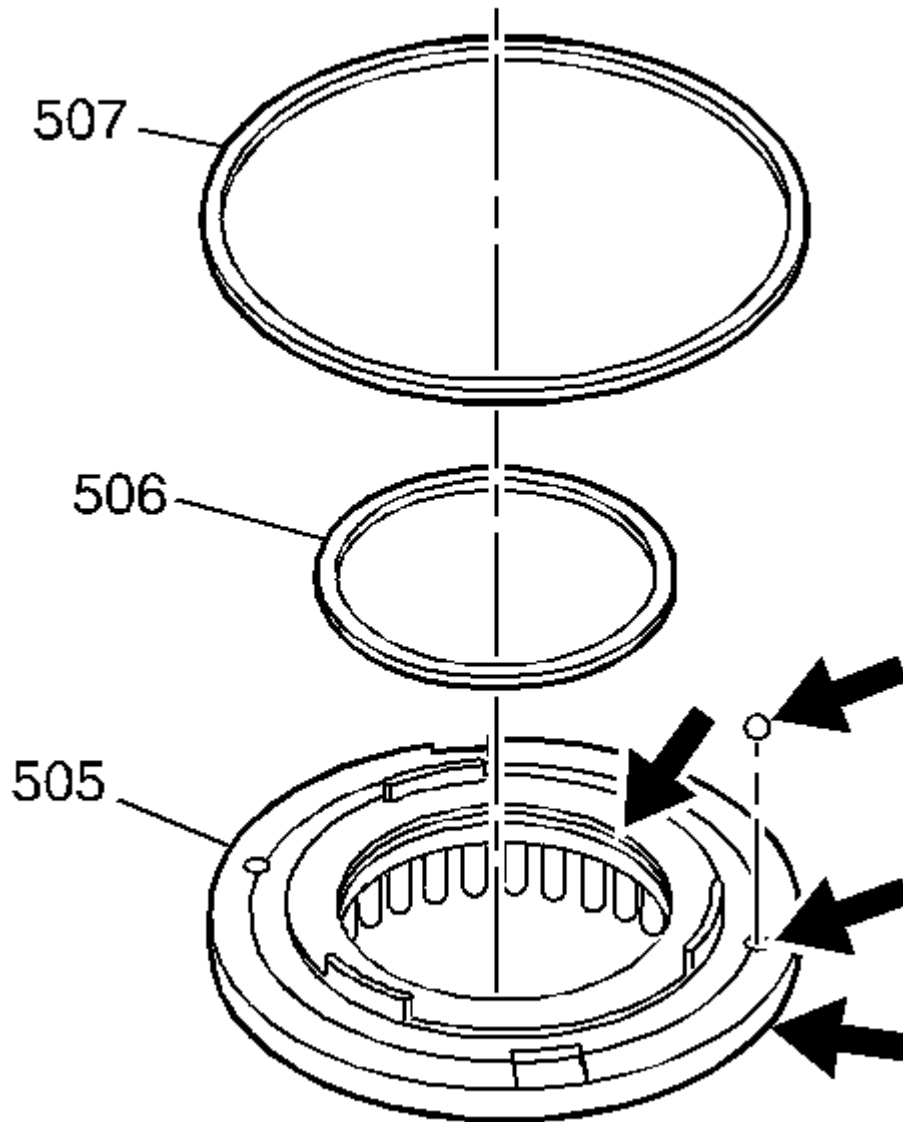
Locating Reverse Clutch Piston Inner & Outer Seal Damage
